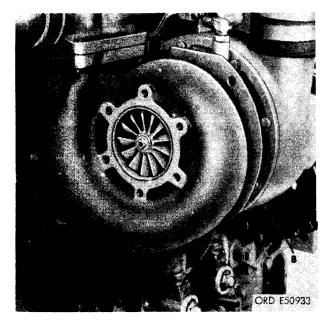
REMOVING OR INSTALLING TURBOSUPERCHARGER ASSEMBLY (EARLY MODEL ENGINES).
